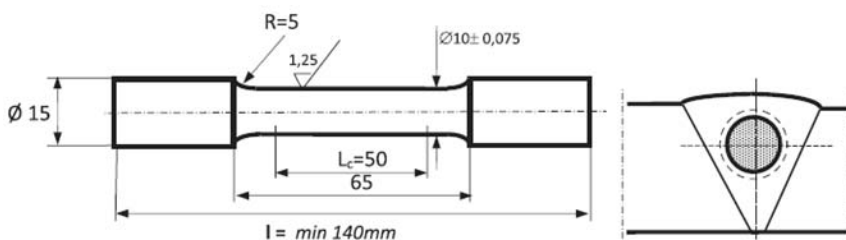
A way of taking and preparing a sample to stretch the weld metal. [26]
